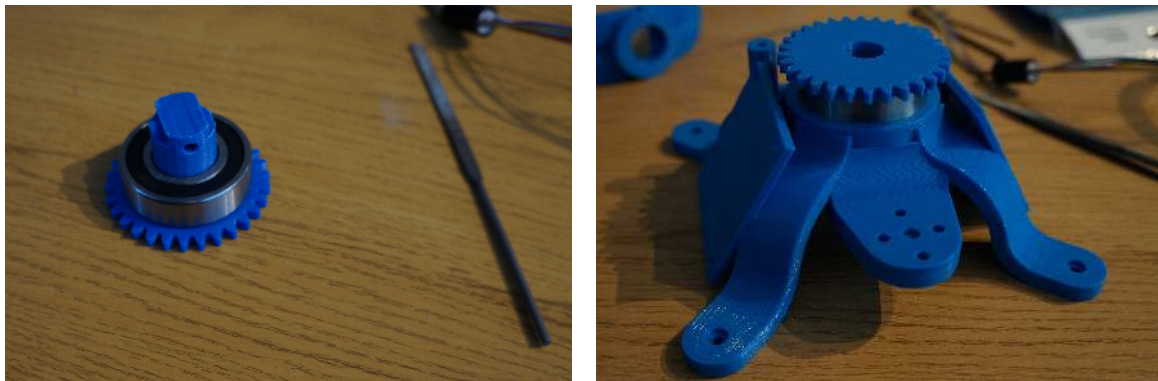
Installing the yaw axis bearing on the geared shaft and joining the pieces together.
